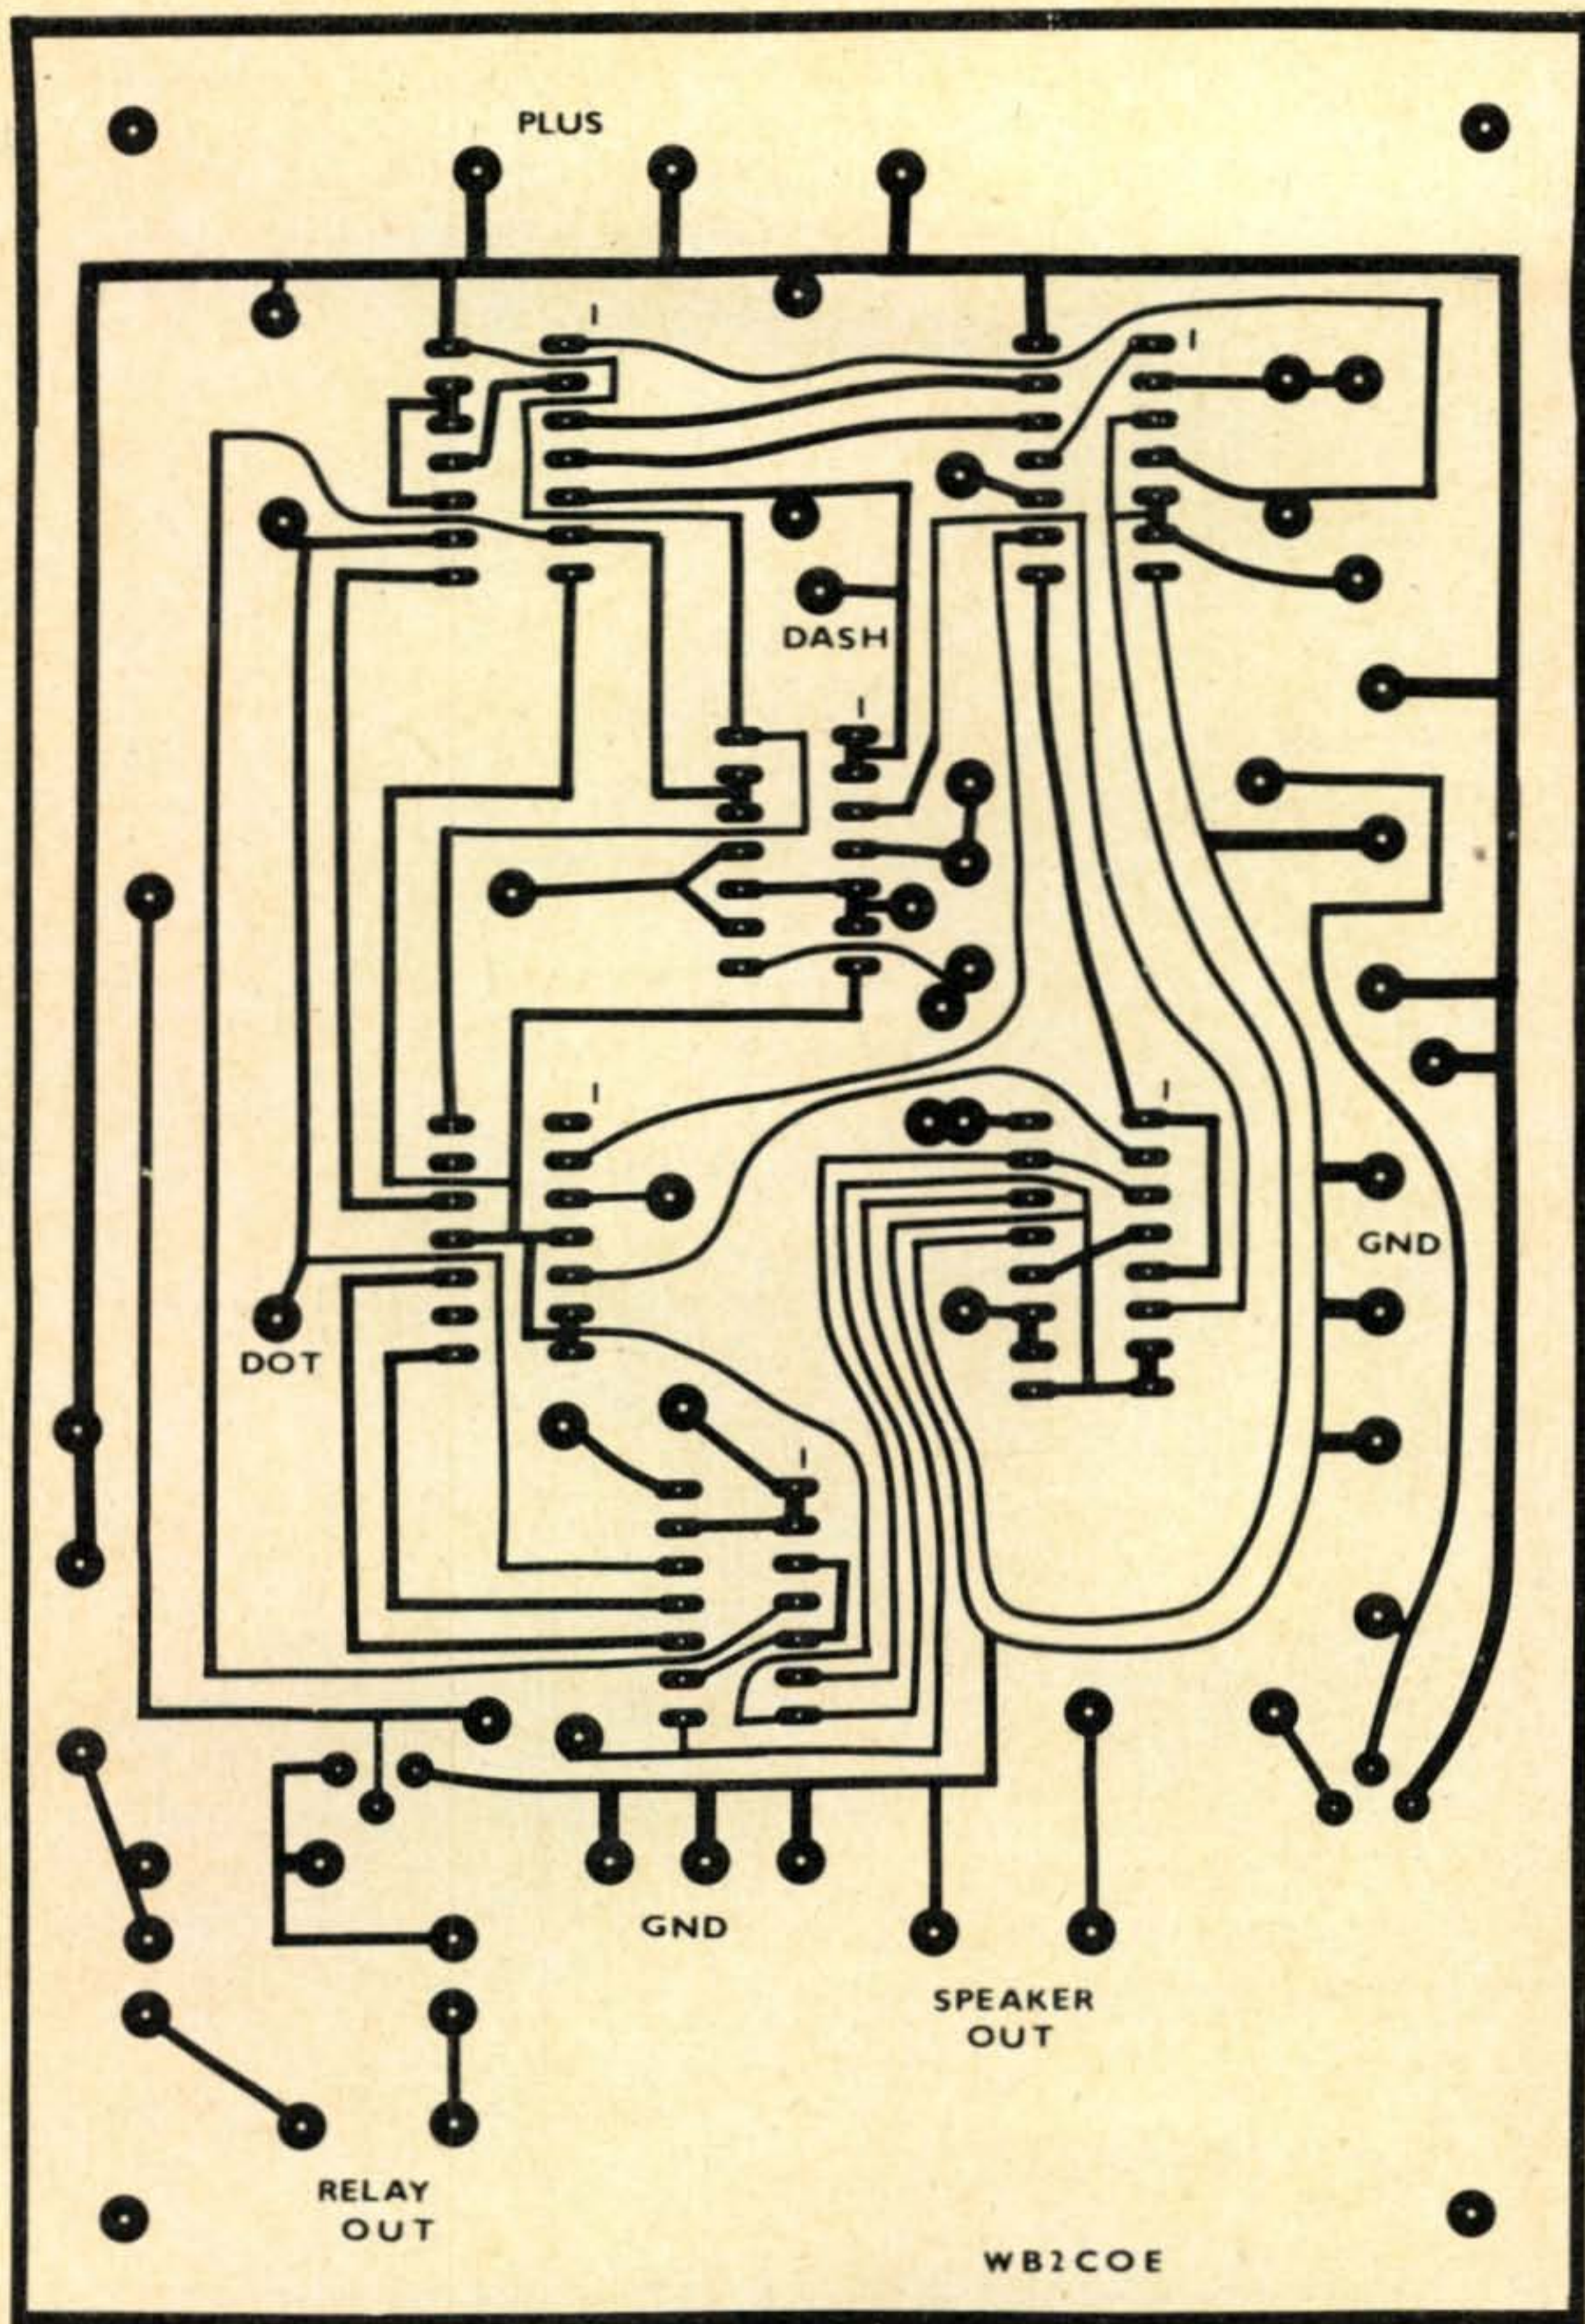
A—Full-size P-C board foil layout for the Version II COSMOS.
